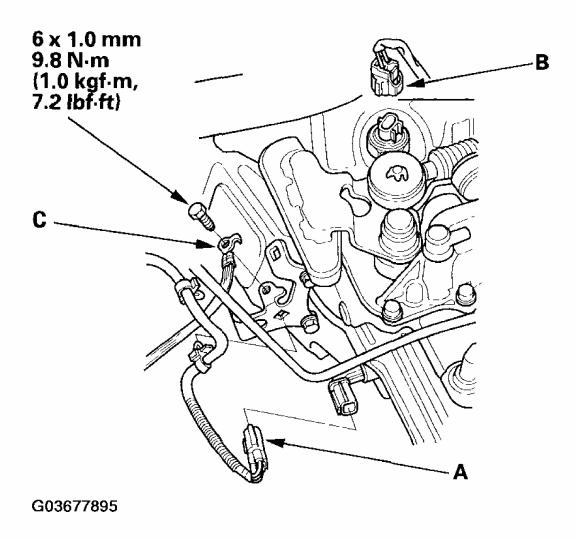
Connecting Output Shaft (Countershaft) Speed Sensor Connector And Back-Up Light Switch Connector
